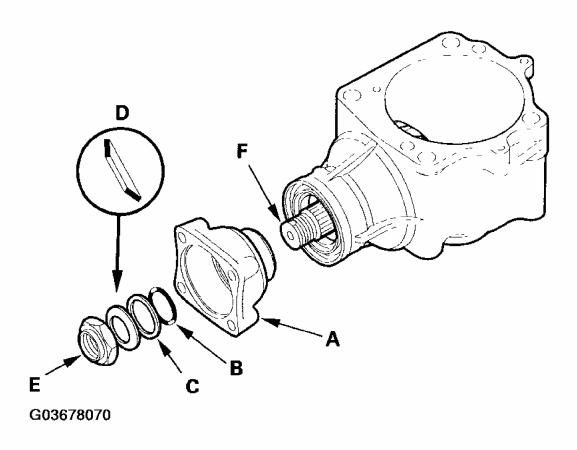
Installing Conical Spring Washer Courtesy of AMERICAN HONDA MOTOR CO., INC.
